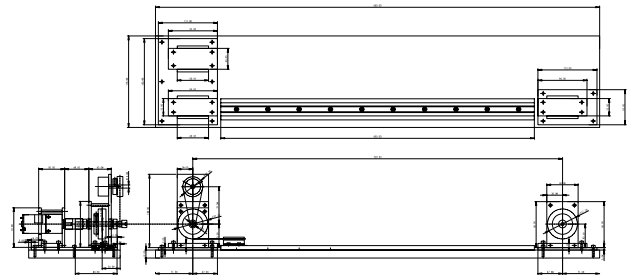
The drawings of the apparatus made by using RootPro CAD Free.
